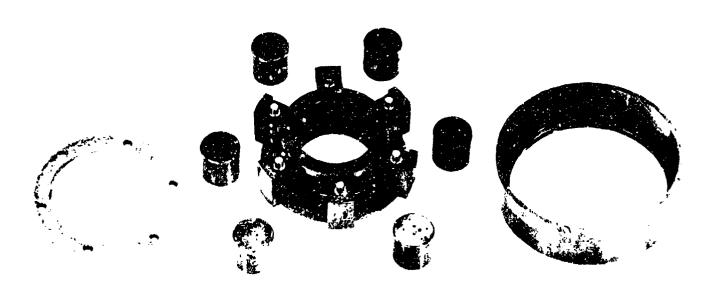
ROLLER BEARING NO. 16 BEFORE TEST
